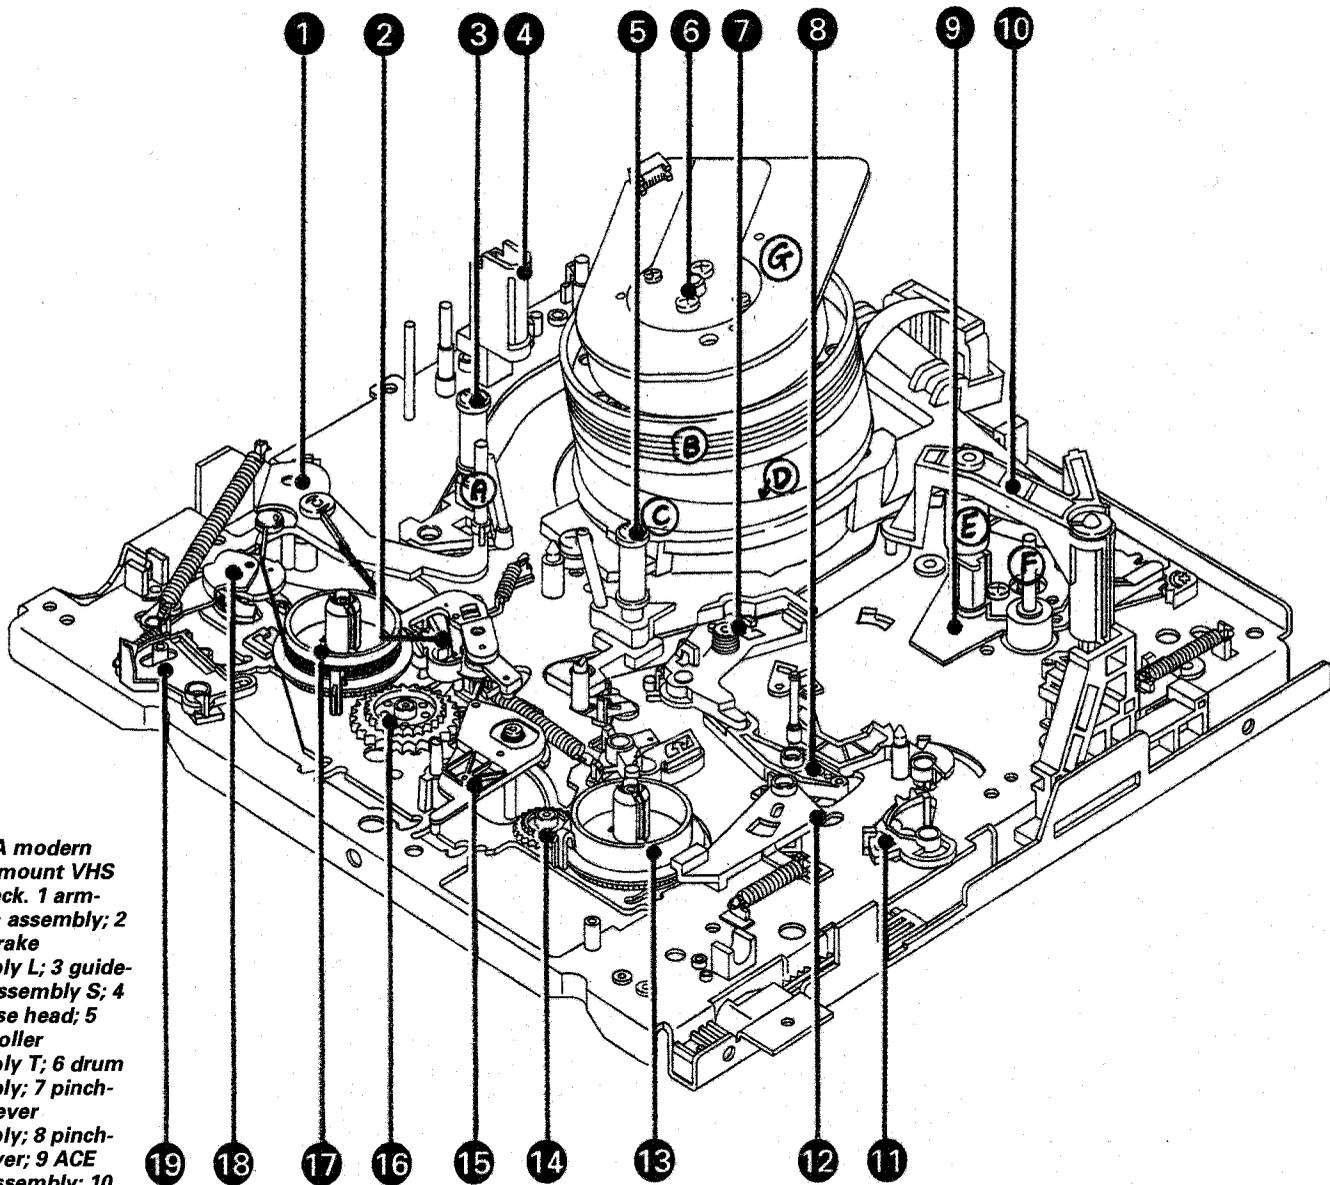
A modern centre-mount VHS tape deck. 1 arm-tension assembly; 2 main brake assembly L; 3 guide-roller assembly S; 4 full erase head; 5 guide-roller assembly T; 6 drum assembly; 7 pinch-comp lever assembly; 8 pinch-cam lever; 9 ACE head assembly; 10 pinch-roller assembly; 11 review lever; 12 brake sub-assembly R; 13 reel-disc assembly R; 14 gear-relay assembly T; 15 idler assembly; 16 gear-relay assembly S; 17 reel-disc assembly L; 18 jog-lever assembly; A back-tension pole; B upper drum; C lower drum; D rabbit; E pinch roller; F capstan; G drum motor.
